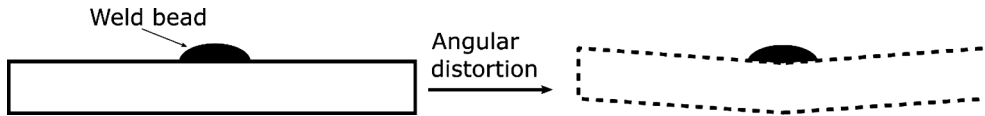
Example of angular distortion due to a weld deposited bead.
